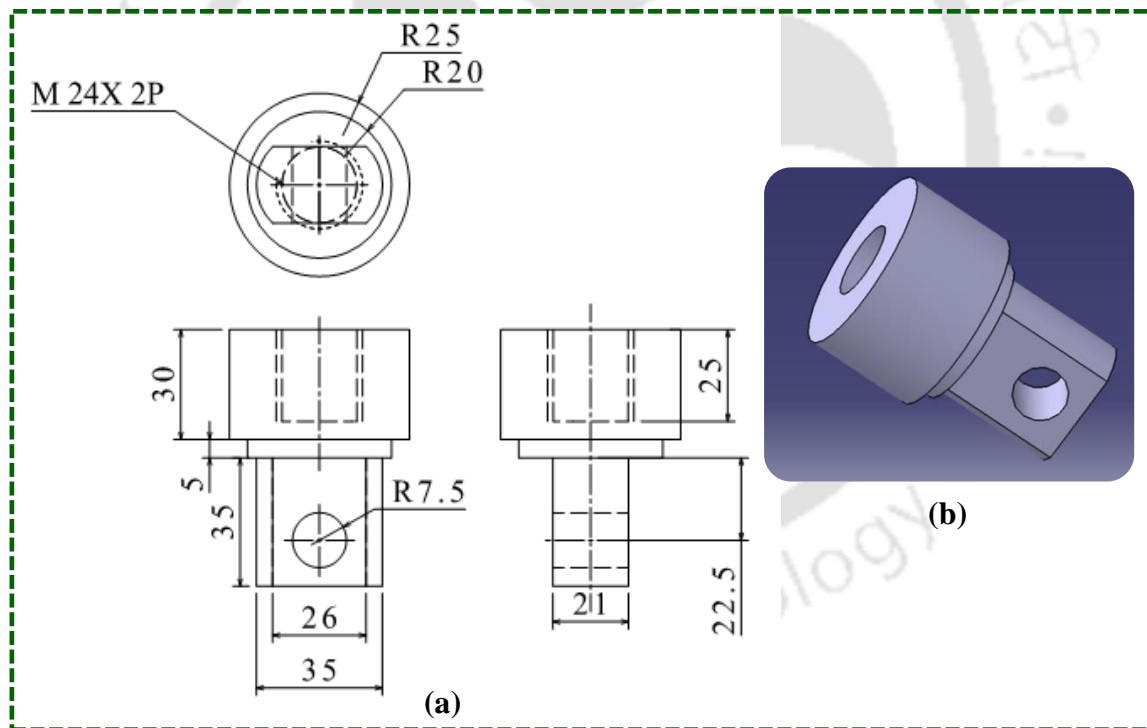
(a) 2-D drawing of connecting rod with dimensions (b) 3-D model of connecting rod (All dimensions are in mm).
